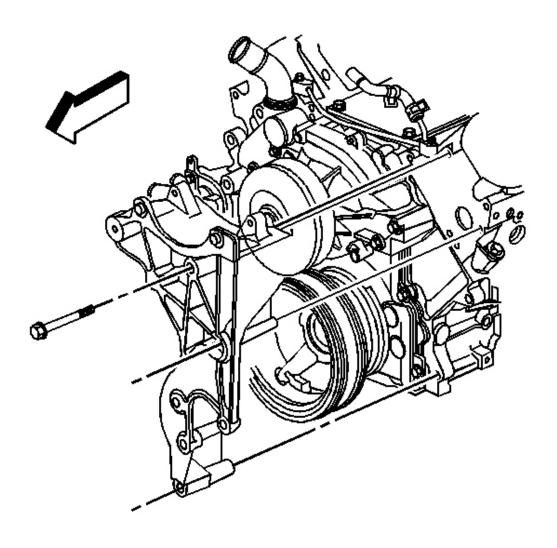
View Of Generator Bracket & Bolts Courtesy of GENERAL MOTORS CORP.
